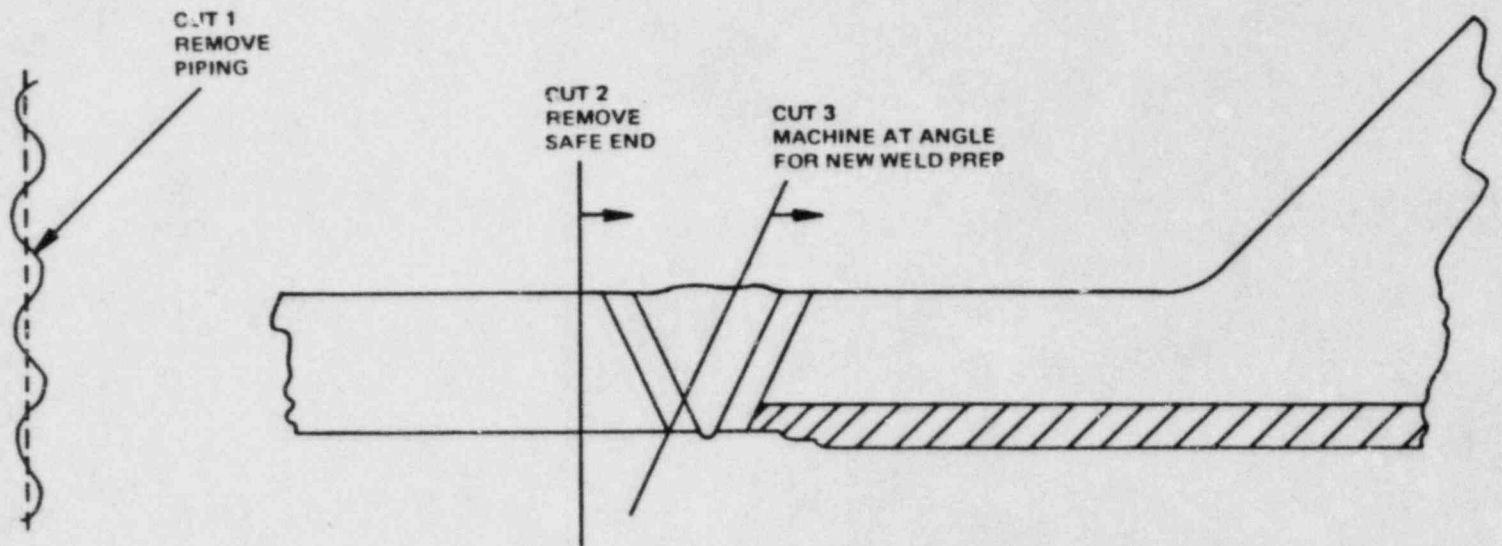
Safe-End Removal and Weld Preparation Technique
